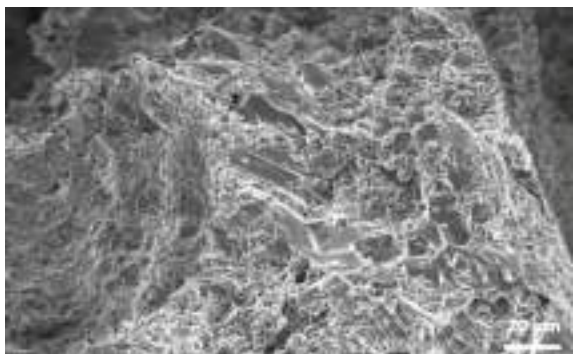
A crack surface consisting of many dimples on a strut indicating ductile fracture
